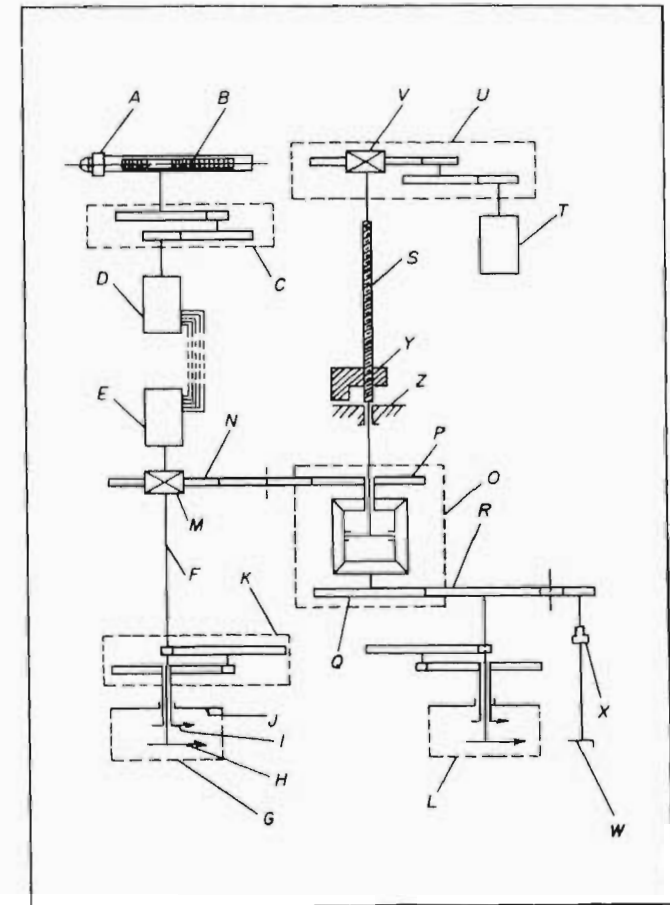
Arrangement that permits remote presetting of the travel of a spindle quill, tool-head, or work-table.
